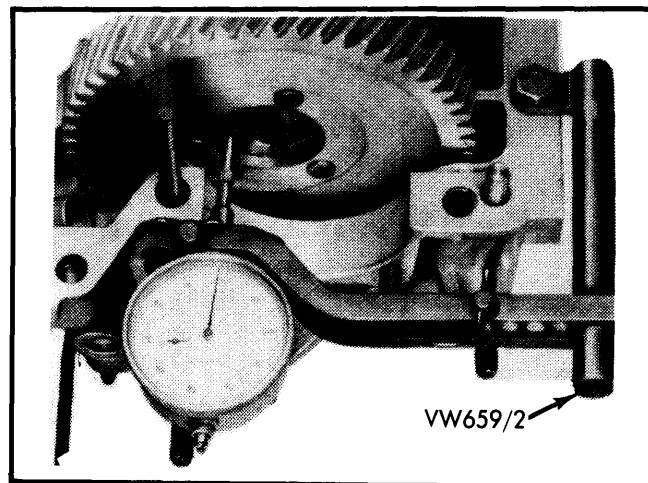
Measuring Camshaft End Play with a Dial Indicator
